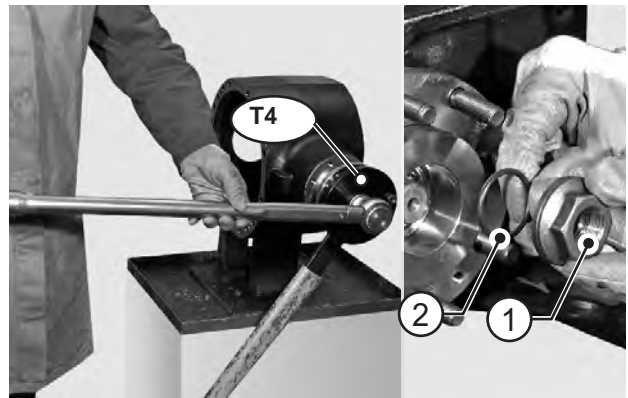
Position tool T4 (See drawing T4 p. 67), so as to avoid pinion rotation. Loosen and remove the nut (1); also remove the o-ring (2).
